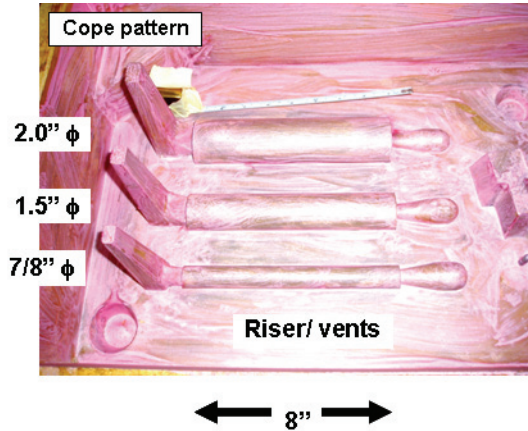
Lower pattern used to make cylindrical castings for tensile bars.
